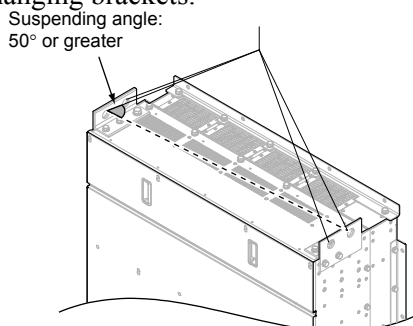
Drive Suspension Using Wires and Hanging Brackets (Models 4□0477 to 4□0930)
